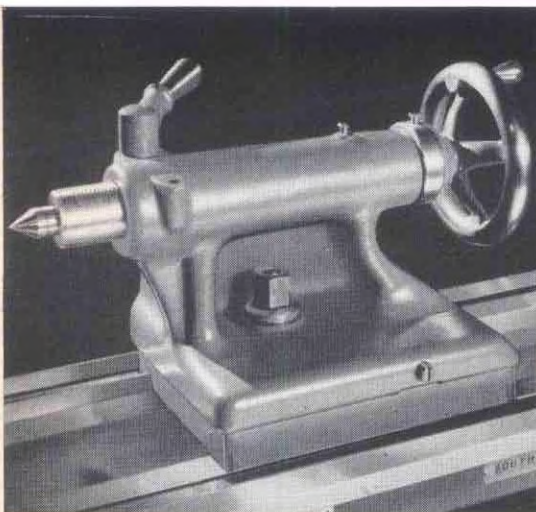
Tailstock Design Used on 13" and Larger Lathes
